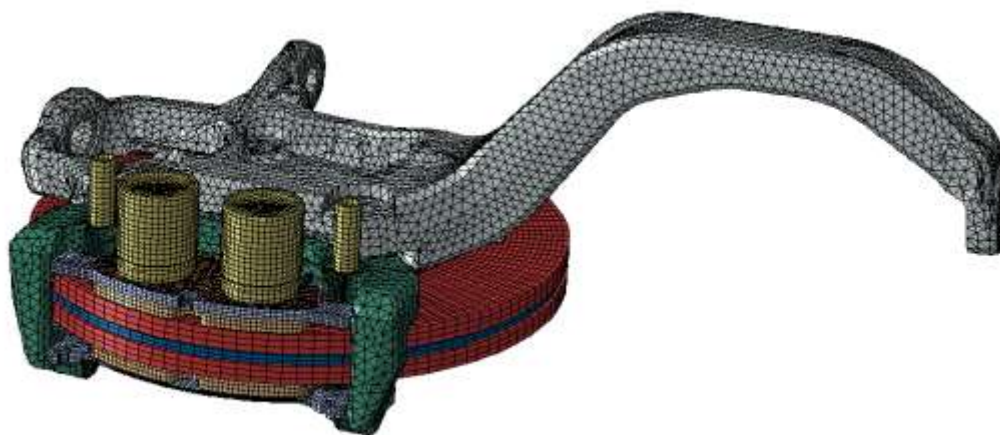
Finite element model of a vented floating caliper disc brake assembly.
